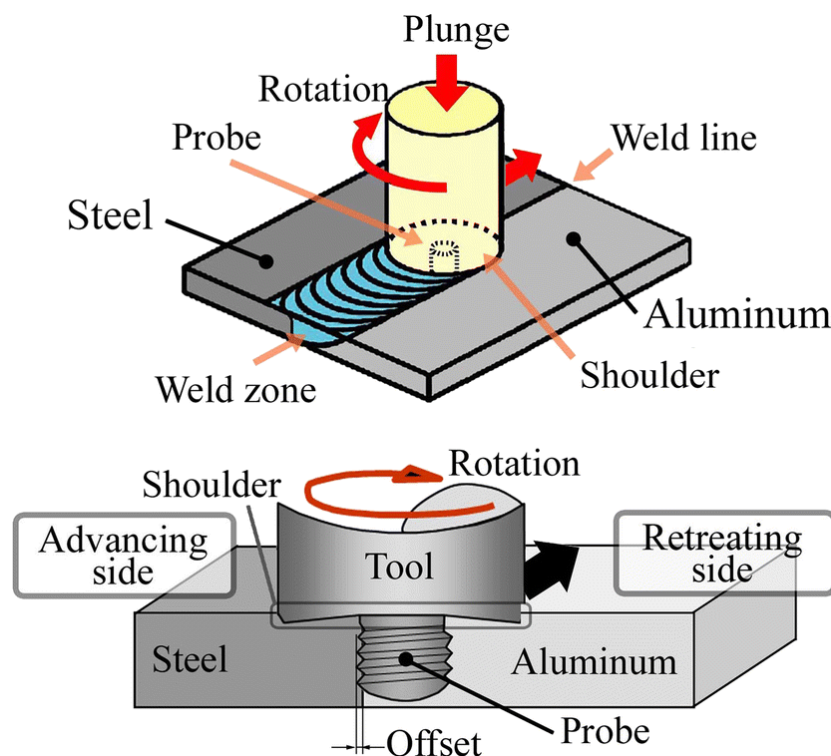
Diagram of the dissimilar friction stir welding (FSW) process
